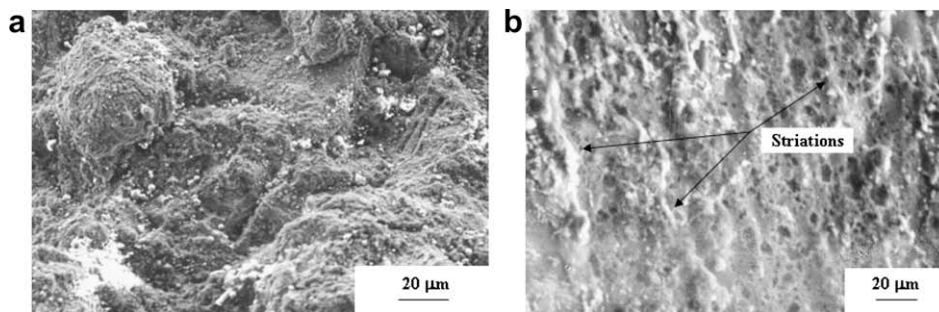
Secondary electron images illustrating the fracture surface of the blade material after descaling. (a) A region showing intergranular failure. (b) A region exhibiting striations typical of fatigue failure.
